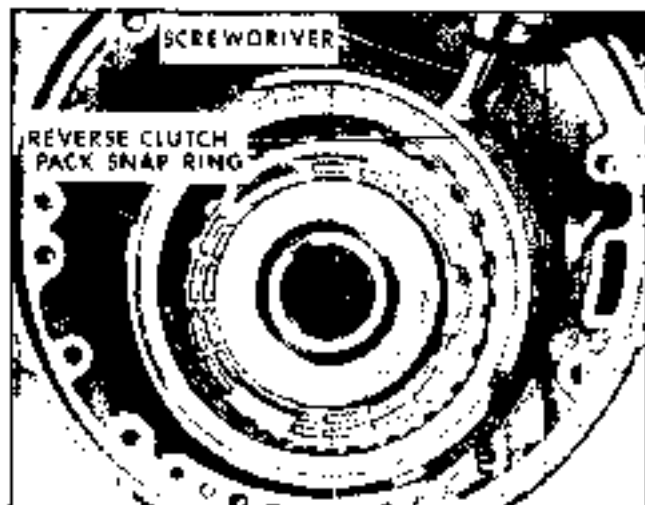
F-35 Removing Reverse Clutch Pack Snap Ring
